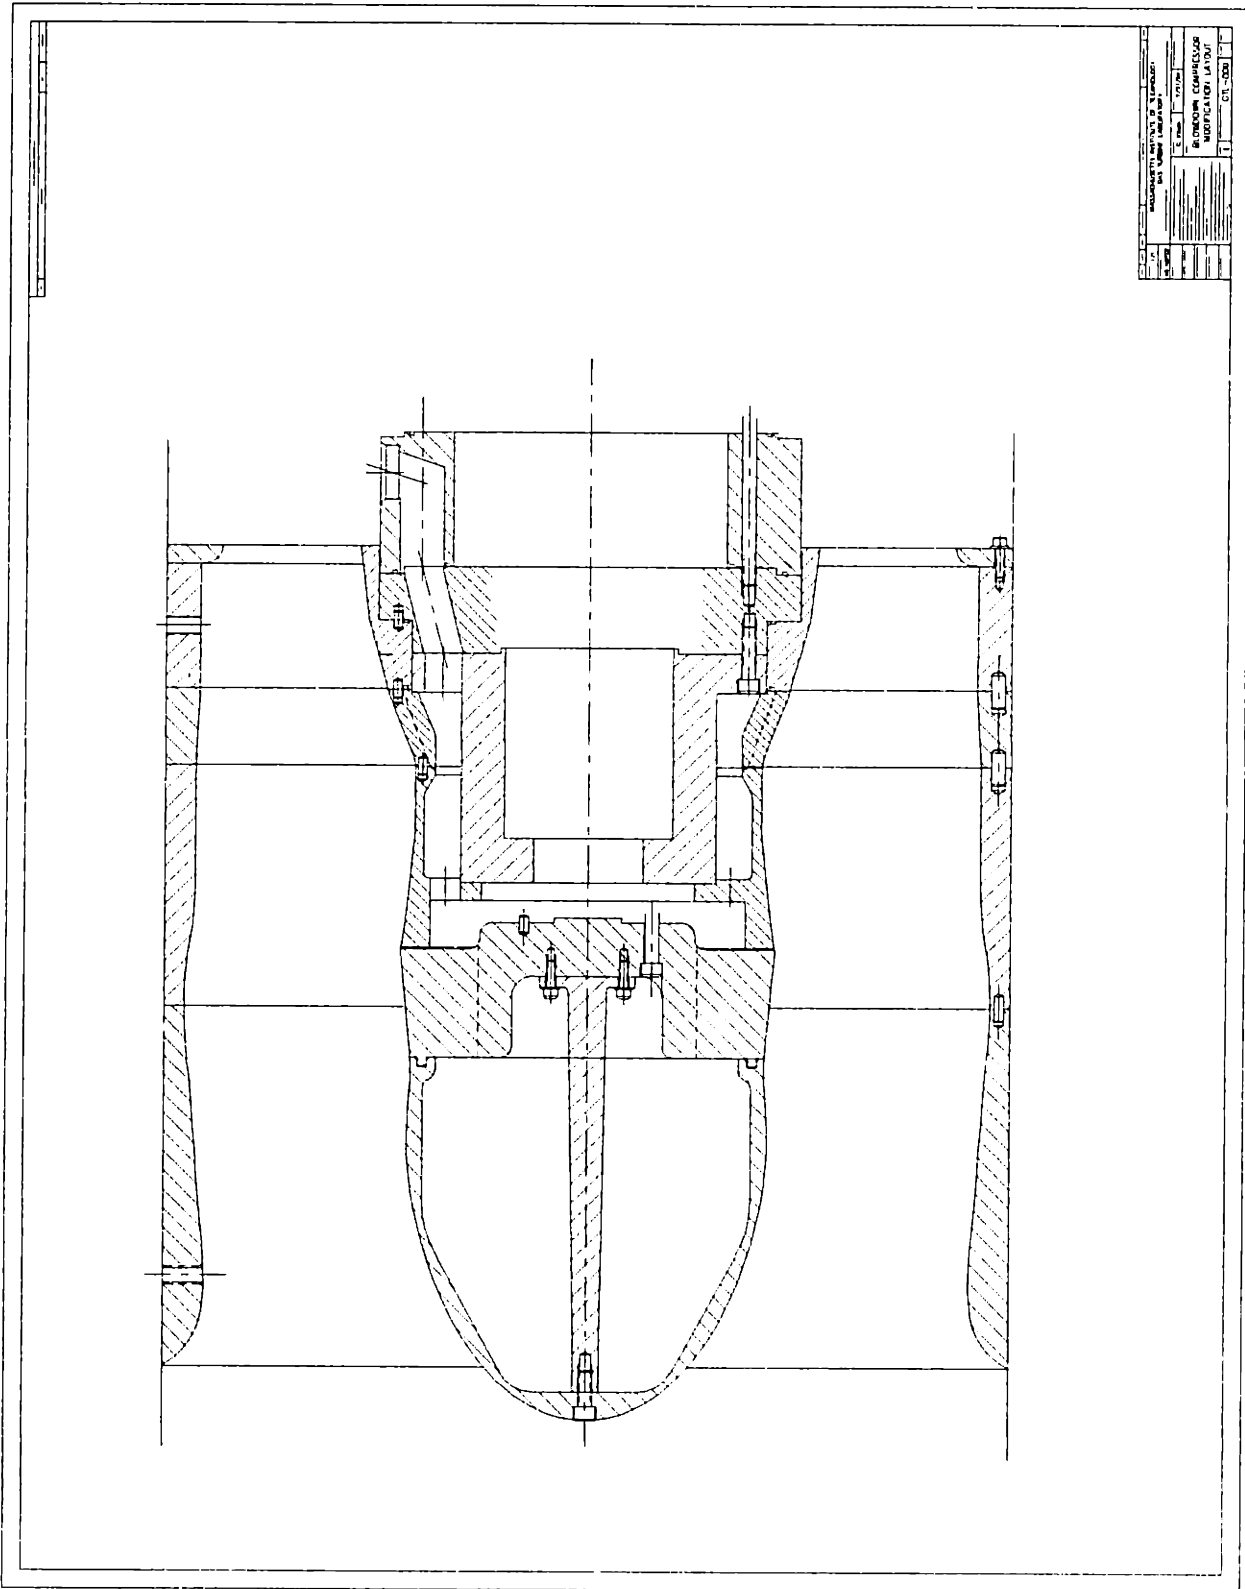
Fan stage drawing (GTL-000): layout drawing
